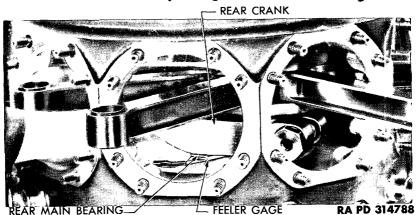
Checking Clearance Between Crankshaft and Rear Main Bearing Using Gage 41-G-400
